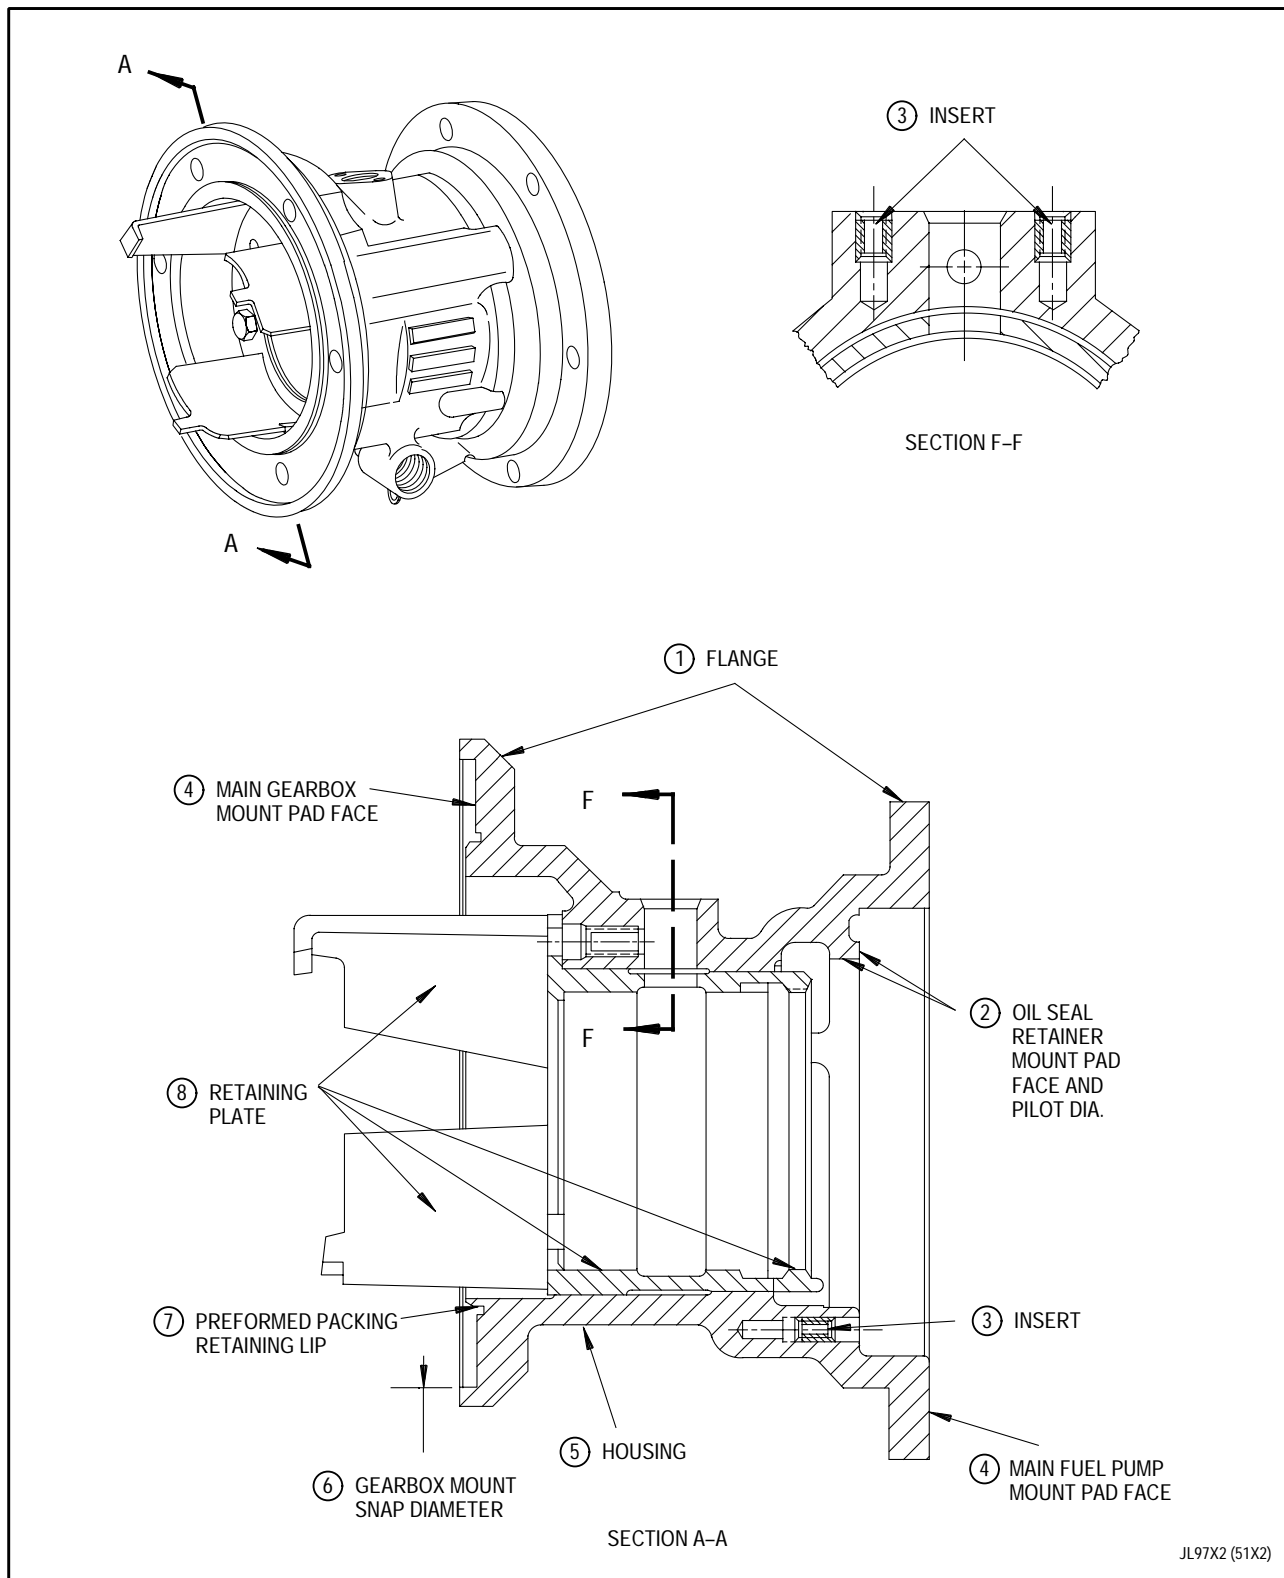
Reduction Gearbox Housing Assembly - Inspection
